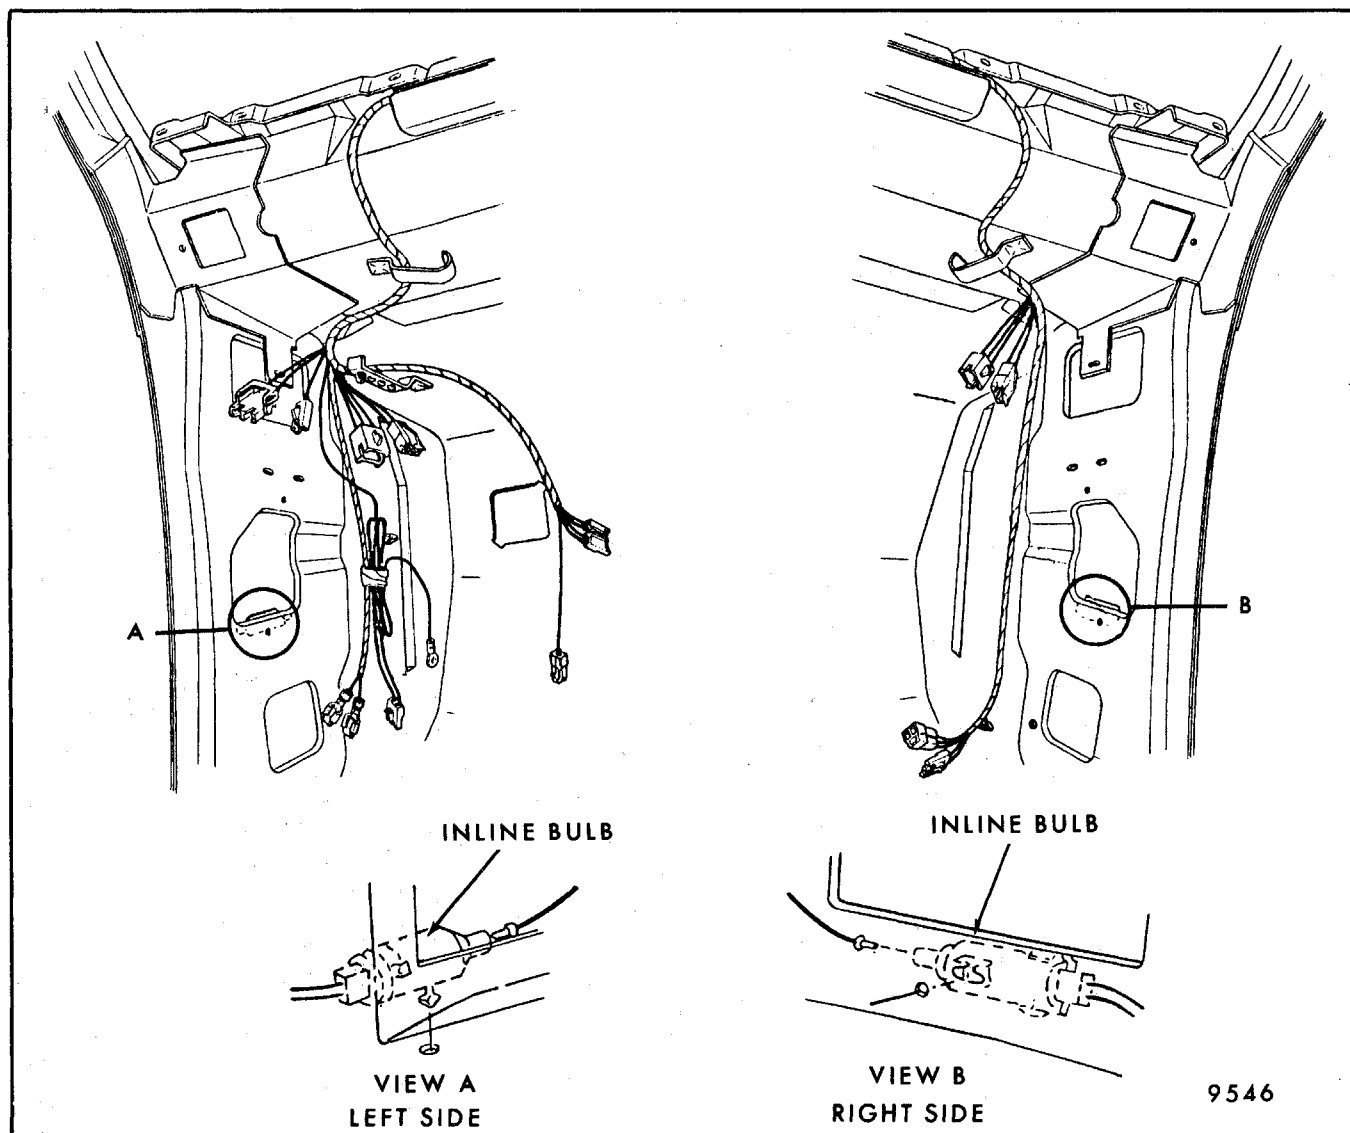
Illuminated Lock Cylinder In-line Bulbs - Oldsmobile Styles
